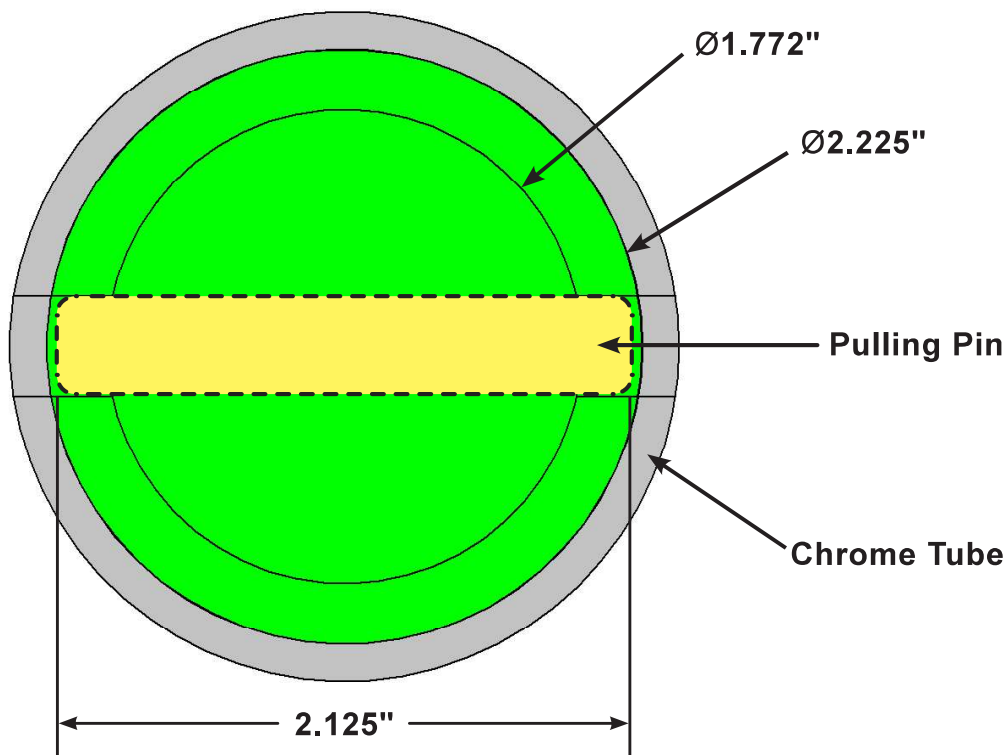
Cross Section View Showing Clearance for Pulling Pin
